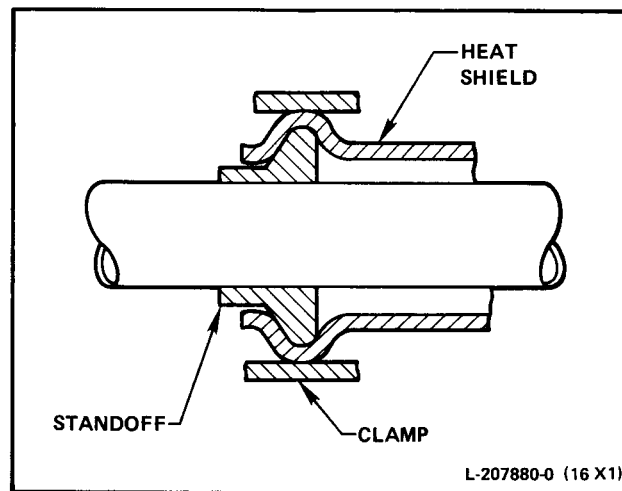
No. 4 Bearing Left Internal Scavenge Tube Assembly - Loose Heat Shield Repair
